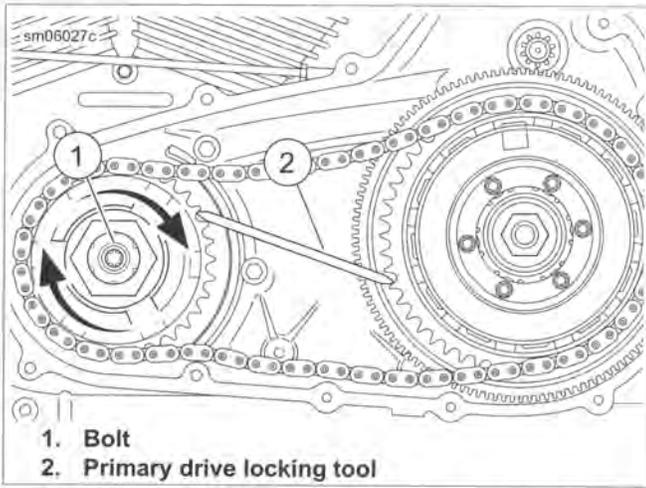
Installing Engine Compensating Sprocket Bolt
